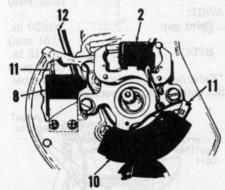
The solid-state ignition charging coil, triggering system and mounting plate (2 and 10) are available only as an assembly and cannot be serviced.
